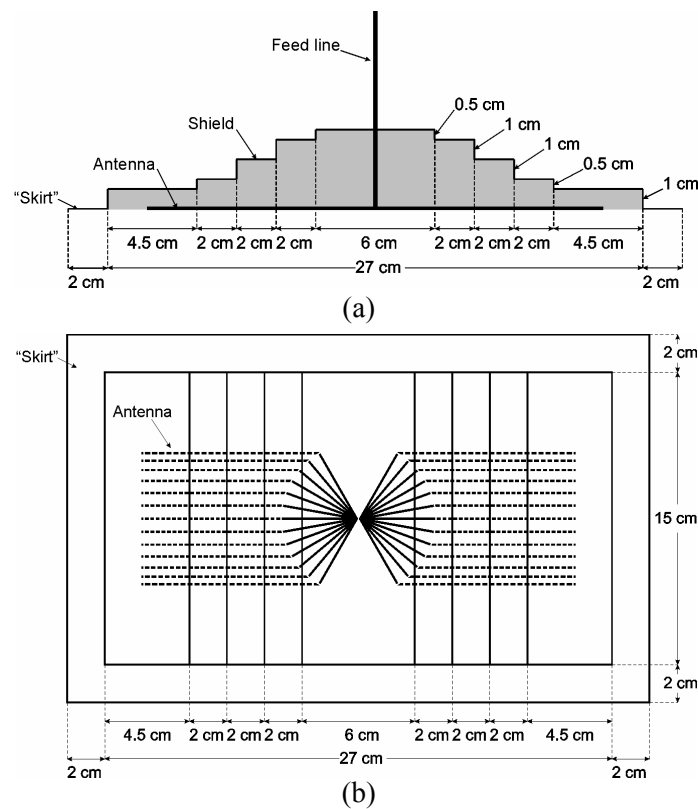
(a) Side view, and (b) top view of the "staircase" shield.
